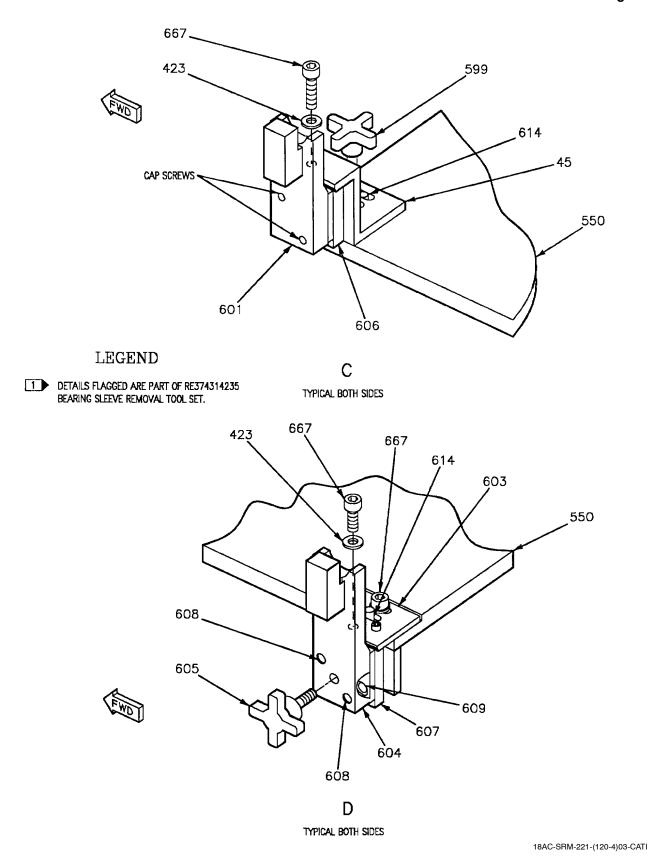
Drag Brace Bearing Sleeve Installation, Nominal Size (Sheet 4)
